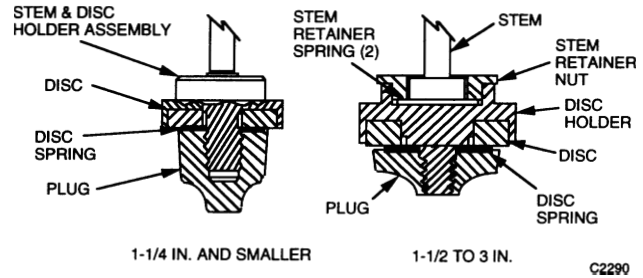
Disc Holder Assemblies Used in V5011A Threaded Body Valves.
